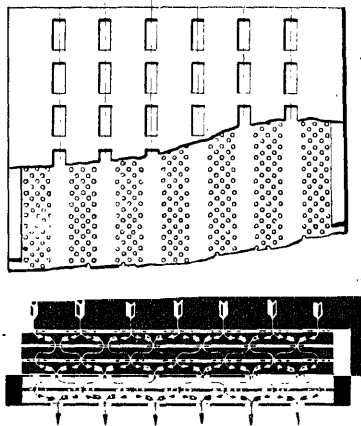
Part Sectional Elevation, and Plan View of one Section of Drum, showing Perforations and the Passage of the Gas through the Plates.
